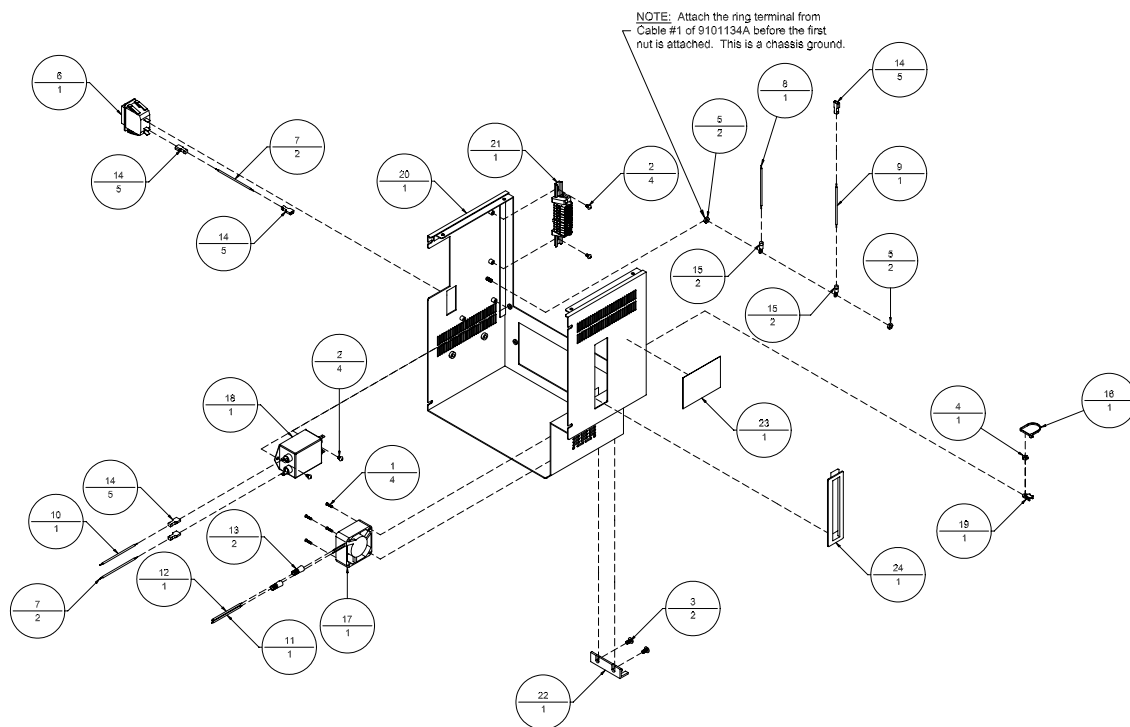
Tabber Back Cover Assembly (9101244A)
